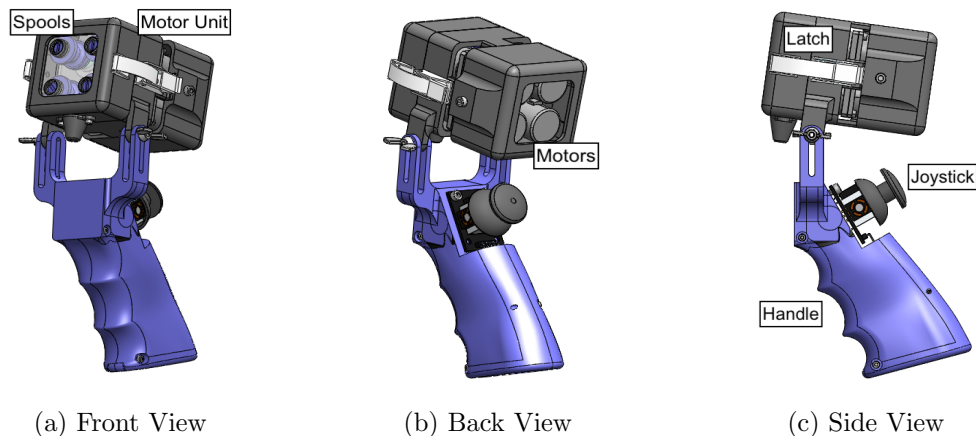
Above is a labeled CAD rendering of the handheld with the current handle design and a recent version of the motor housing unit equipped with the current motors and spool set seen from multiple views.
